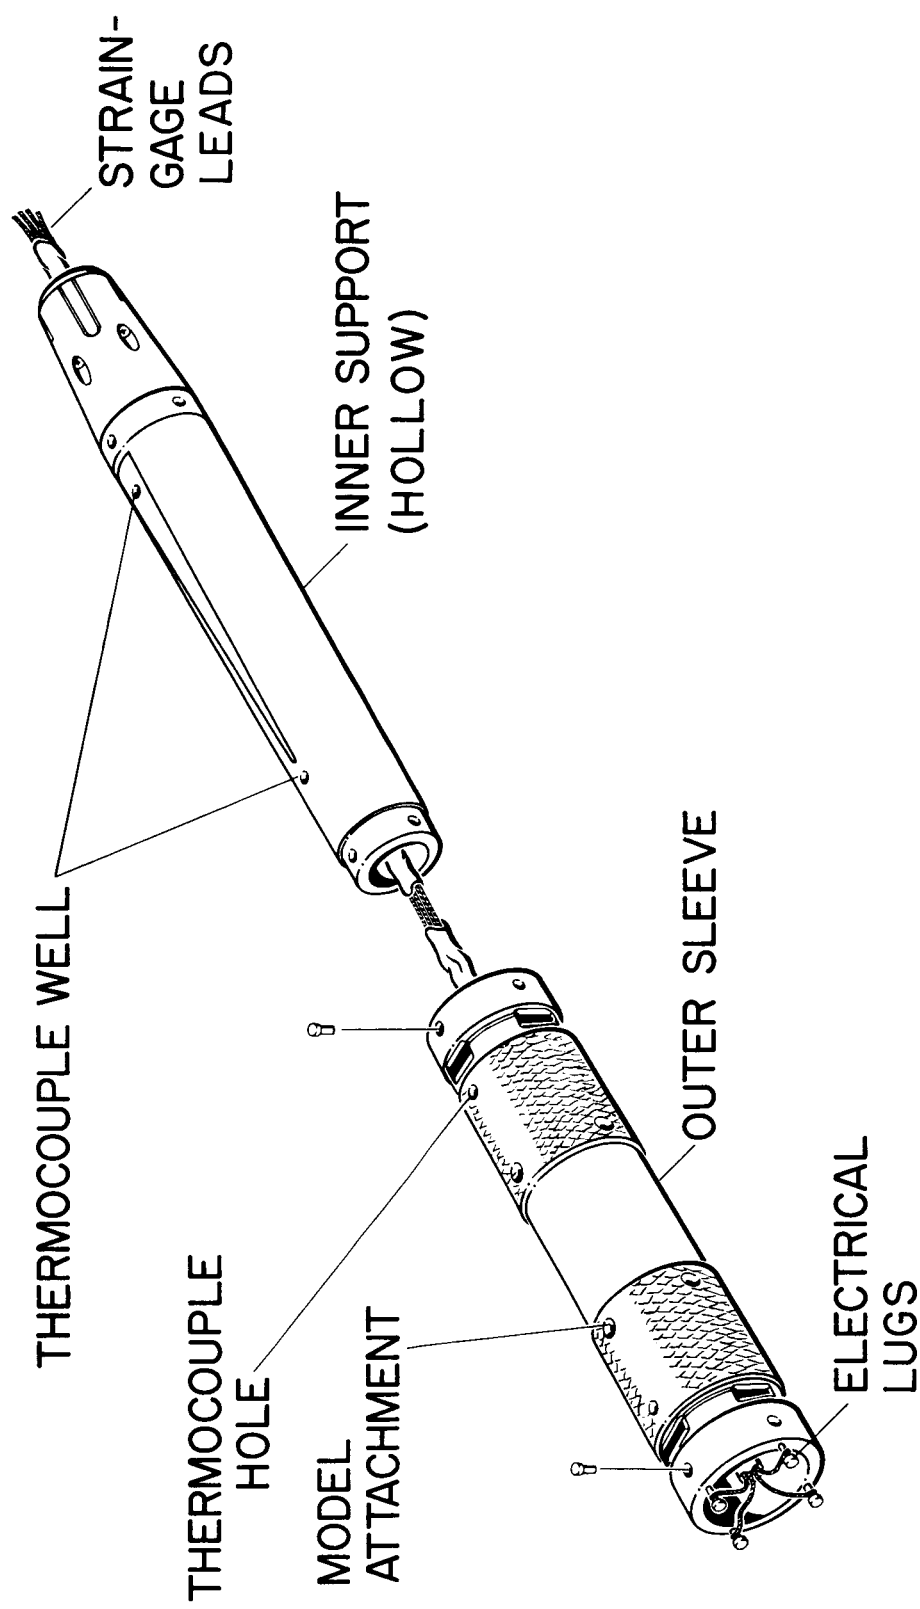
Disassembled view of Ames 2.5-inch two-plane balance.
